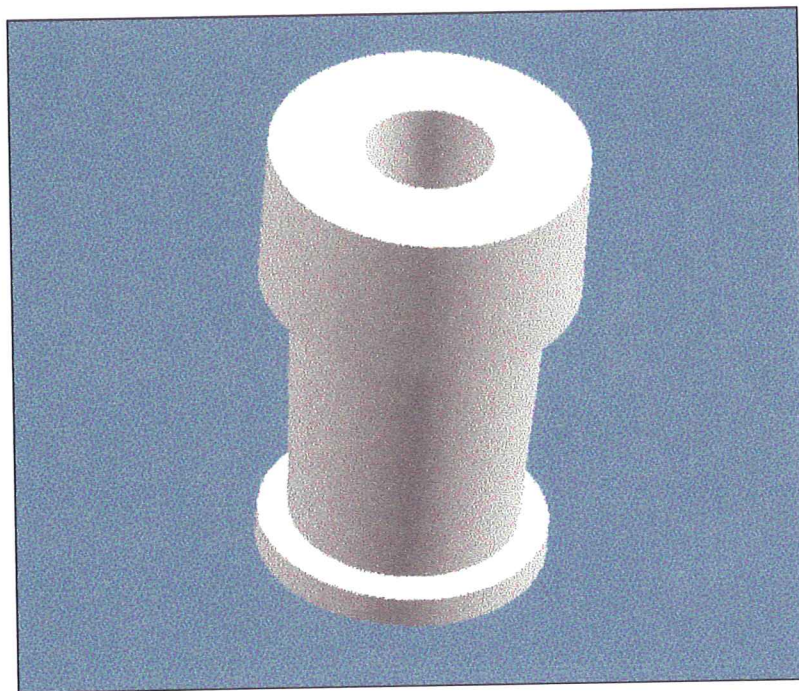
Solidification of an aluminium ring into an steel mould. Initial geometry of the part and the mould.
